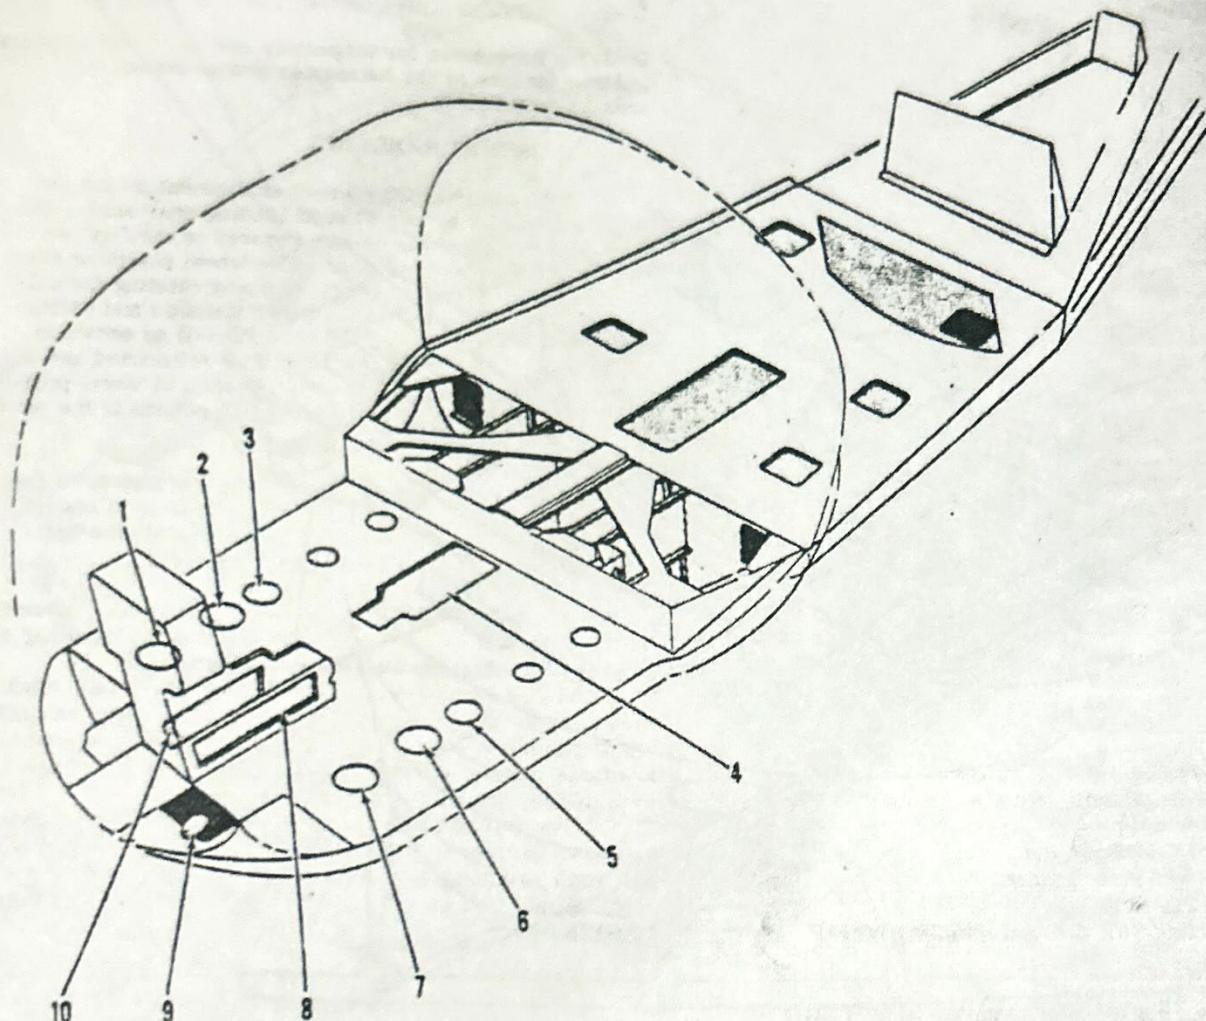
Accessory Equipment (Sheet 2 of 2)
